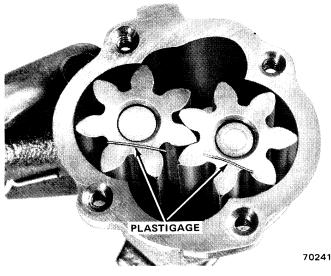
A-32 Oil Pump Gear End Clearance Measurement —Plastigage Method
